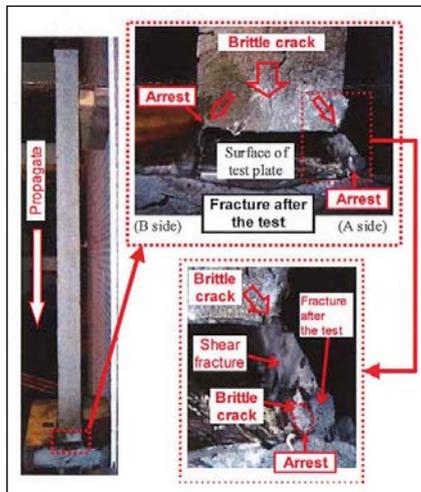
Fracture surface of the scenario 1 specimen
